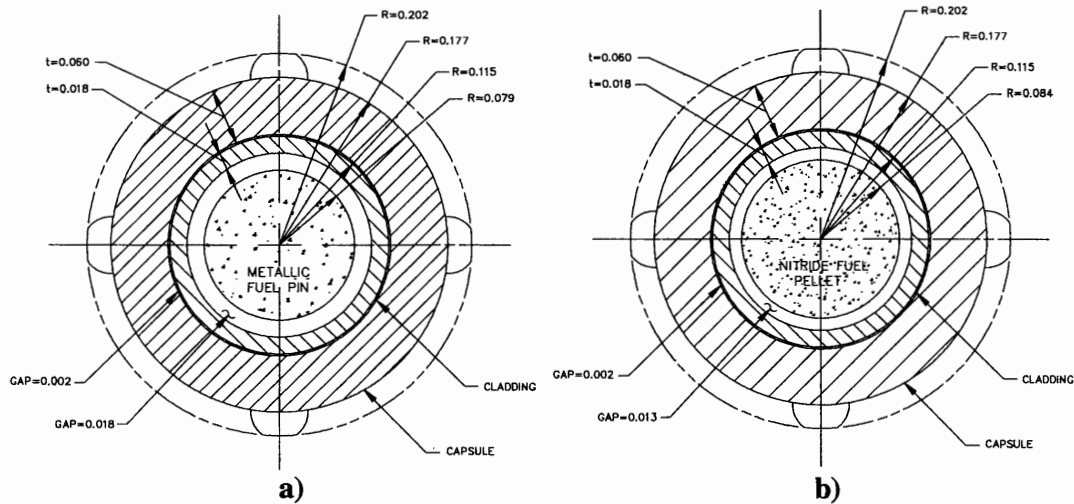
Radial dimensions (inches) of capsule and fuel rodlet assemblies for a) metallic fuel and b) nitride fuel
